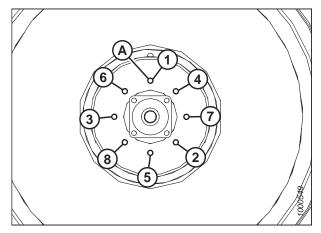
Forked Caster Wheel Nut Tightening Sequence
